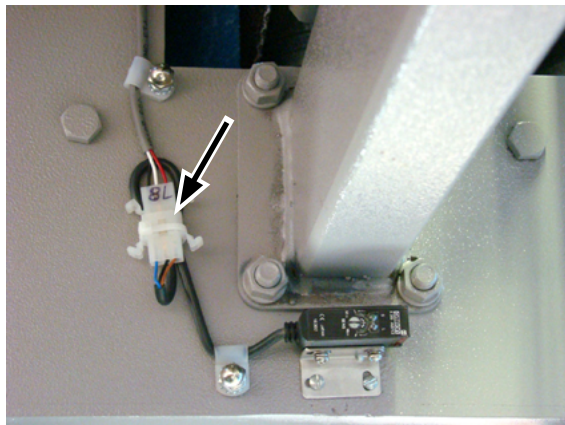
Photosensors are connected to the unit using white connection plugs.
